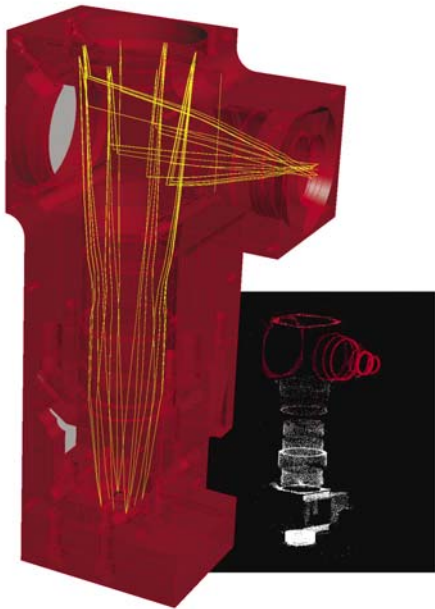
Optical and mechanical 3-D modelling combined with CMC machining enables design and manufacturing of high resolution optics needing no optical adjustments.
